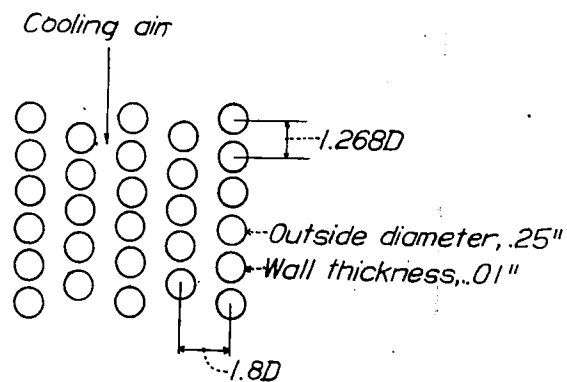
Internal geometry and dimensions of Airesearch tubular aluminum intercooler.
